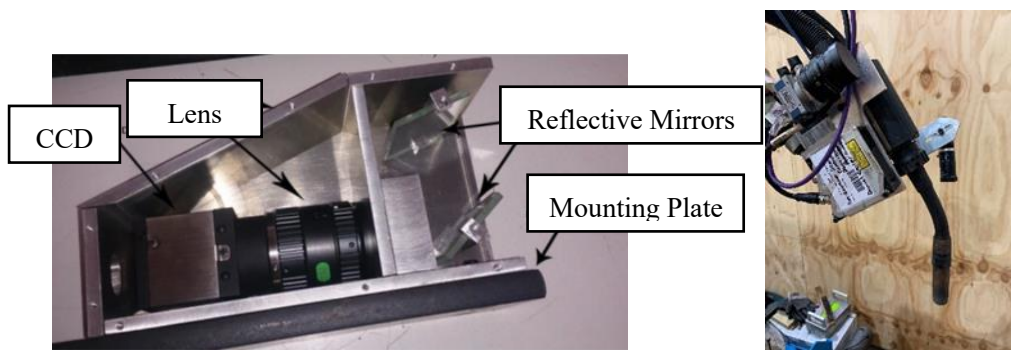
Camera Equipment (top-TIG & bottom-MIG)
